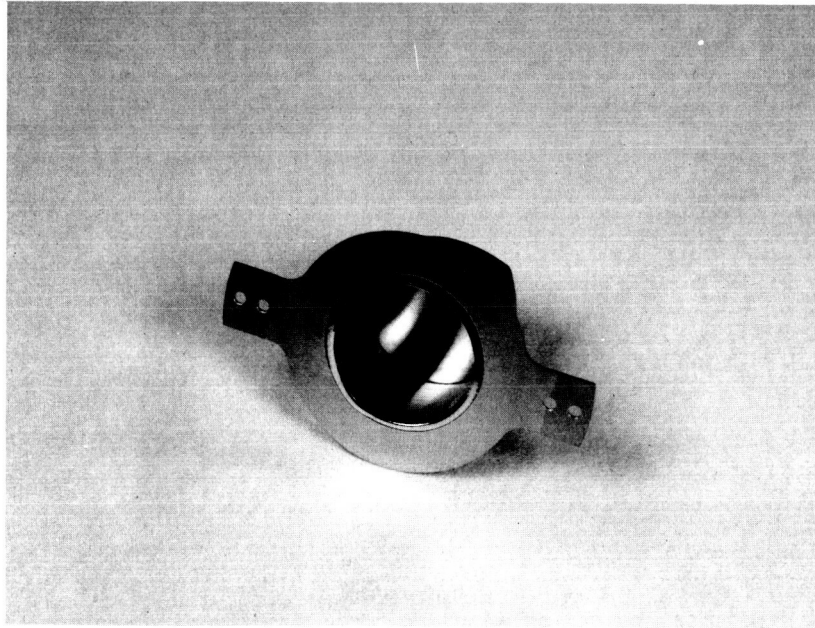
Ta-Nb Beam Weld on SET VIII-P-3 Converter
